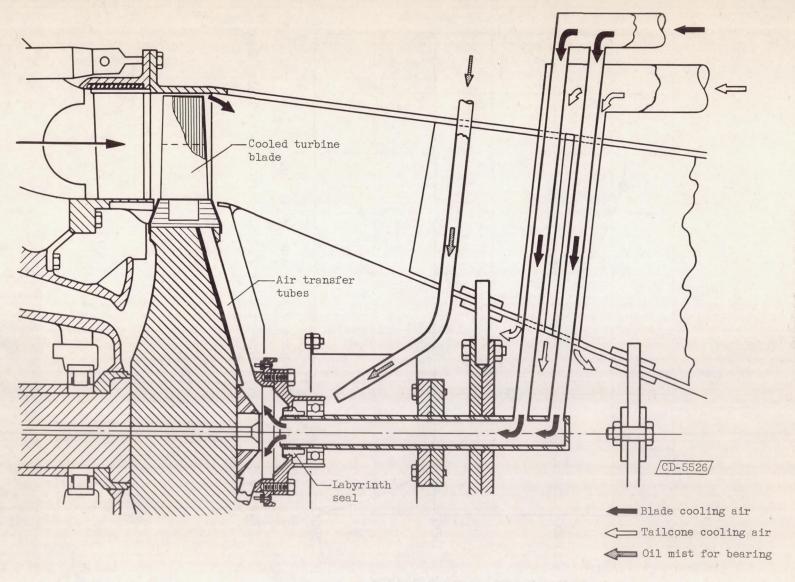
Cooling air transfer device for engine tests with two cooled blades.
